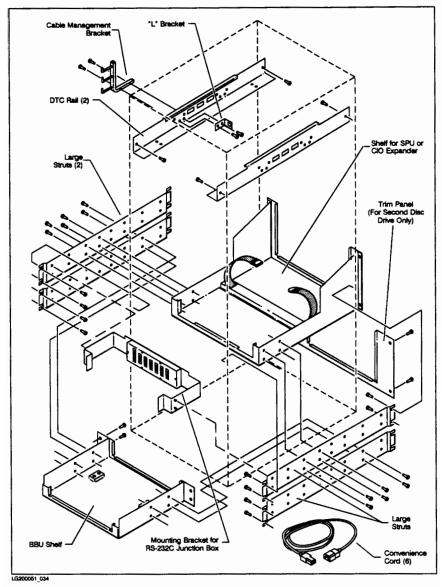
Mounting Hardware of the A1001A Large Cabinet
